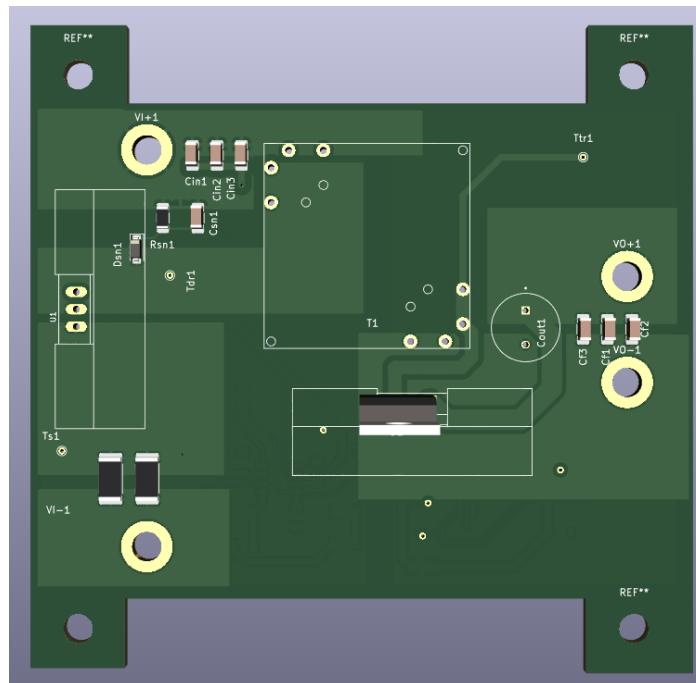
KiCAD PCB model of the overall circuit of the designed converter: 3D Model (Back Layer)
